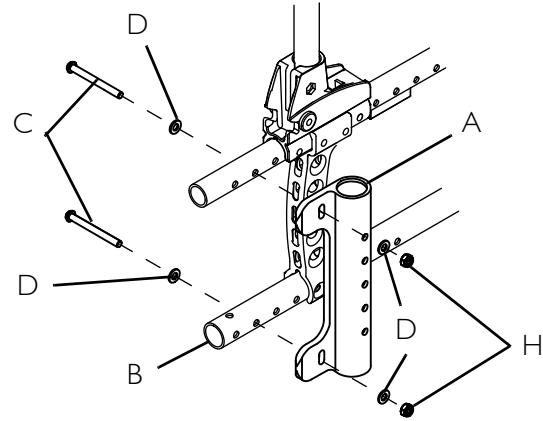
Installing the Optional Swingaway Padded Armrest Socket Assembly
